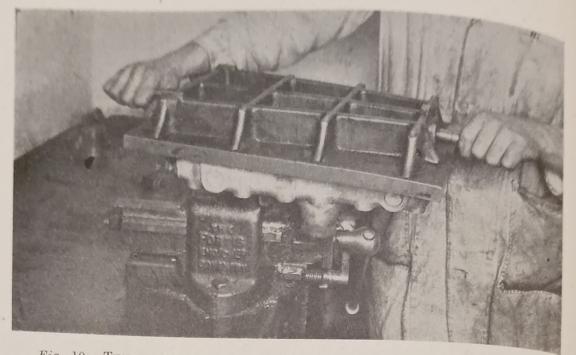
TESTING THE ALUMINIUM CYLINDER HEAD WITH A SURFACE-PLATE
